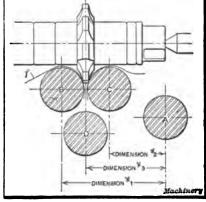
Cutter for Milling the Teeth of Spur Gears
